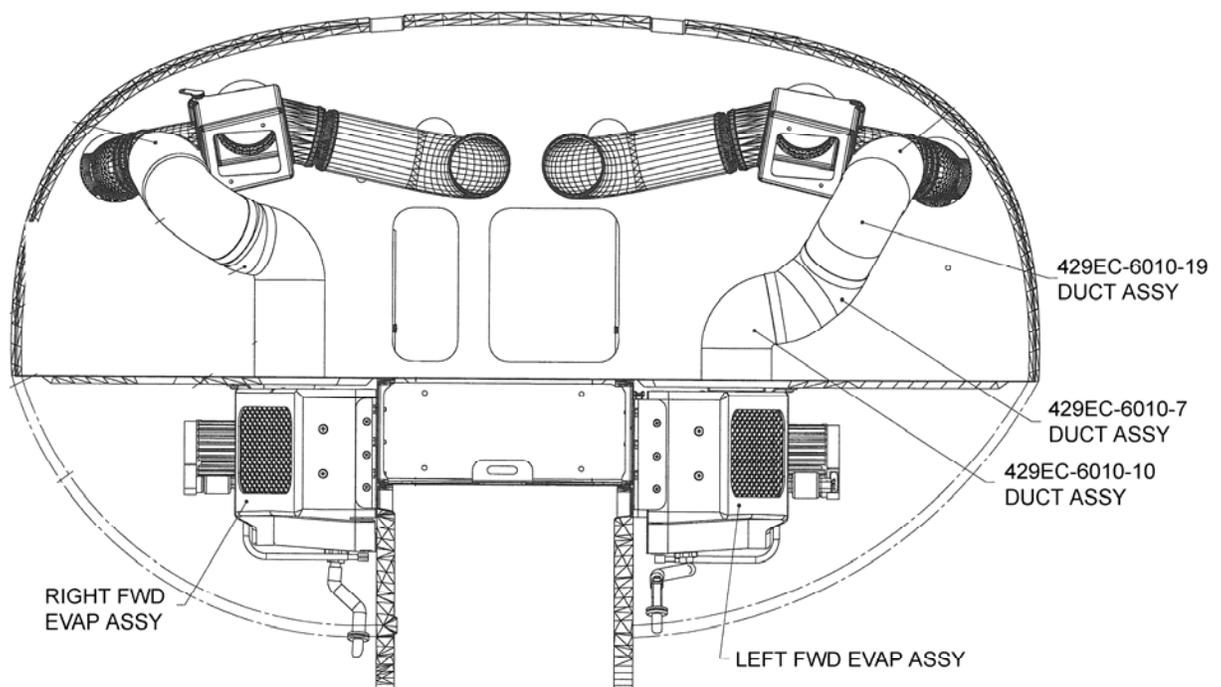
View Looking Aft at Fwd Evaporators and Ducting
